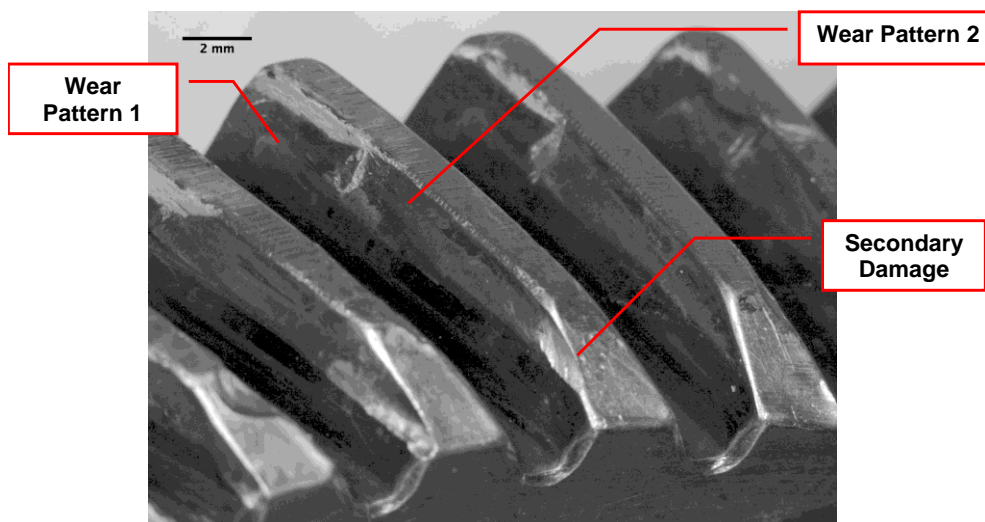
Typical appearance of the wear patterns observed on the face of the gear teeth
